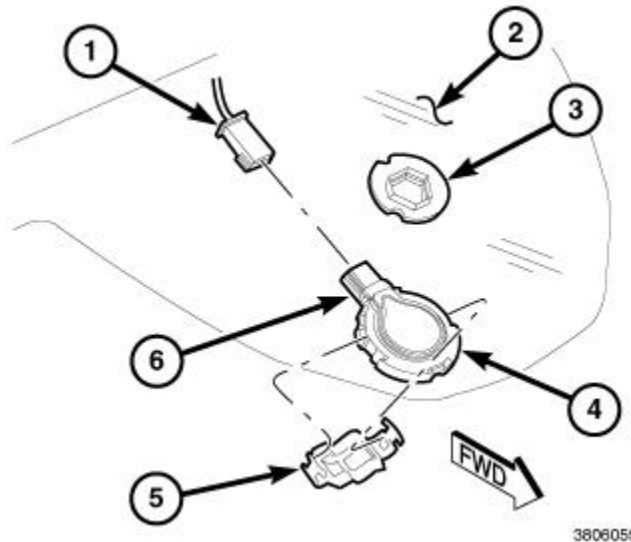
LRSM, Harness Connector, Mount Bracket & Retaining Strap
